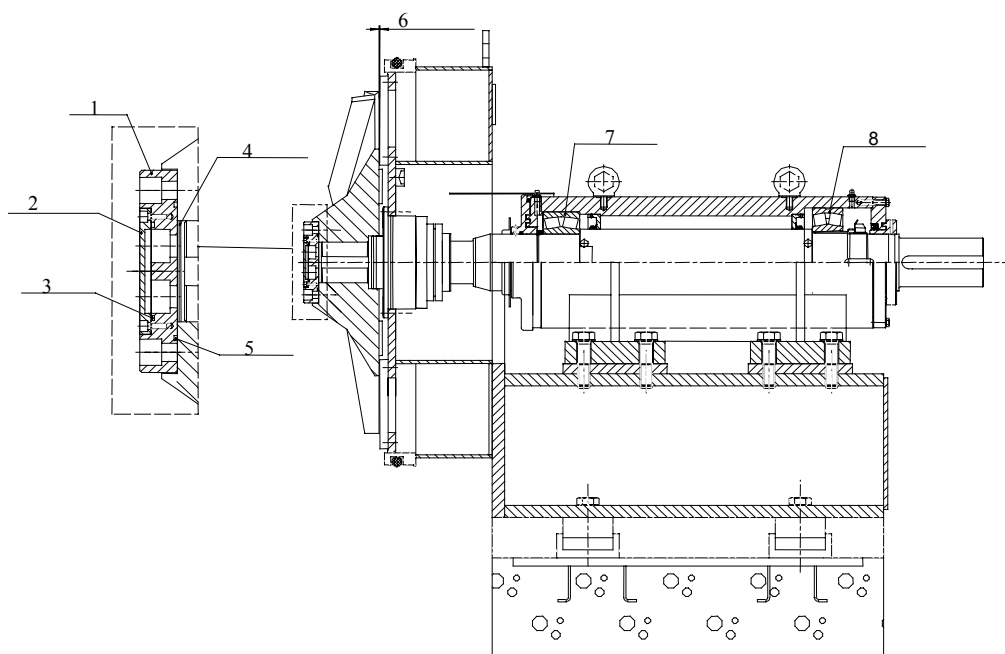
Adjusting the rotor clearance, belt drive (STOA009546)
